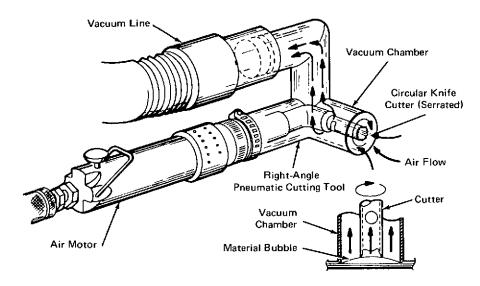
Vacuum Lift Attachment for Use With Right-Angle Pneumatic Hand-Drill
